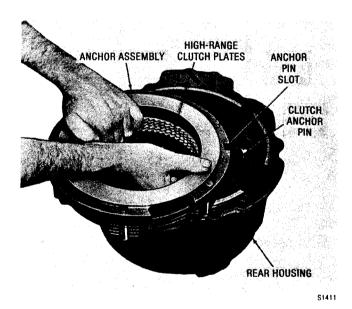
Removing high-range clutch anchor and plates (TRT 2221-1, 2421-1)
